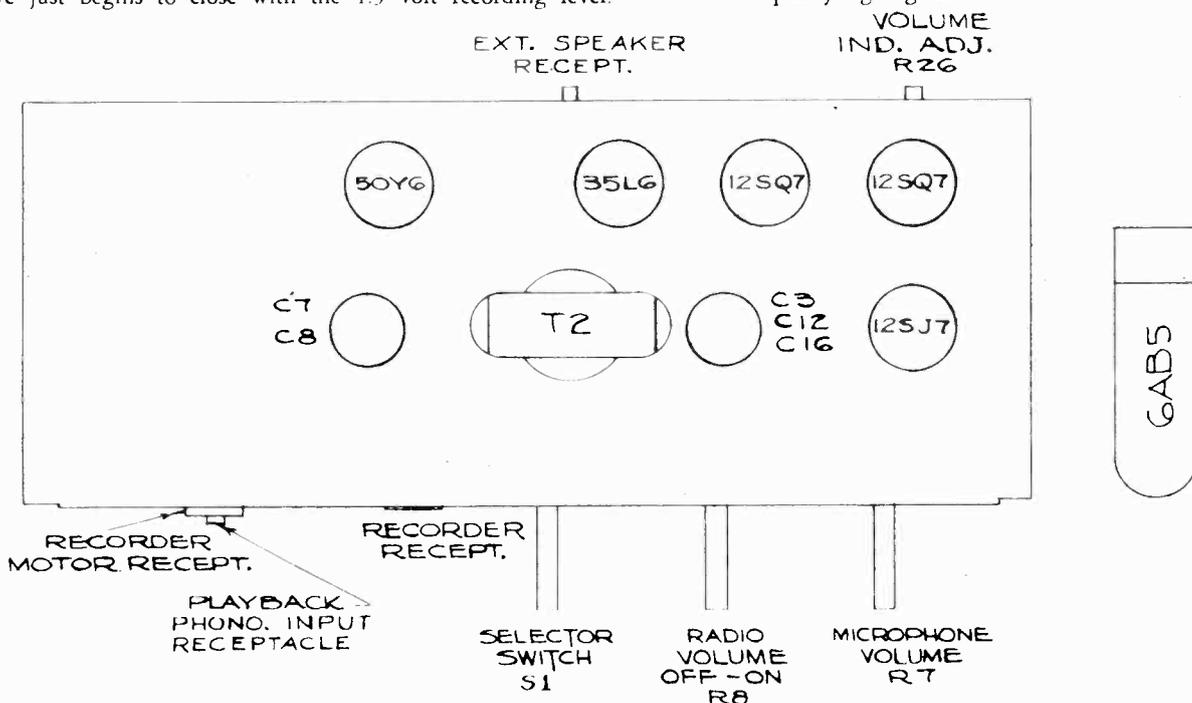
TUBE LOCATION AND PARTS LAYOUT TOP VIEW CHASSIS 133
